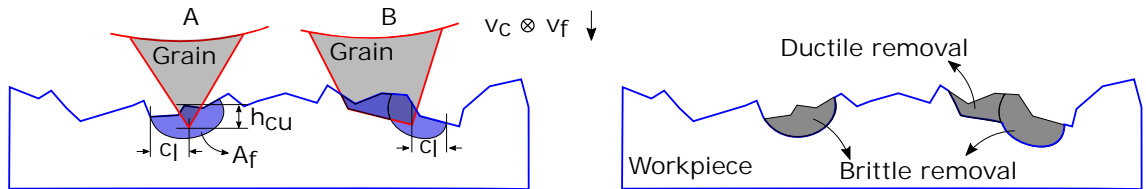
Conditions of brittle and ductile workpiece removal modes, dimensions and geometry of brittle and ductile material removal.
